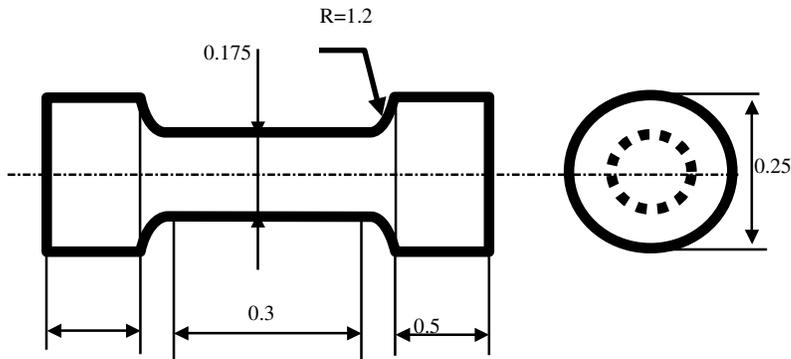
Specimen geometry and dimensions for fatigue test specimens.
